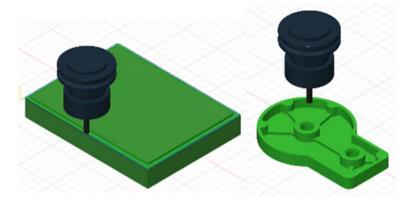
Part manufacturing using CAM tools—milling operation with tool and tool holder (in black color), raw part on the left side and finished part on the right side, both in green color
